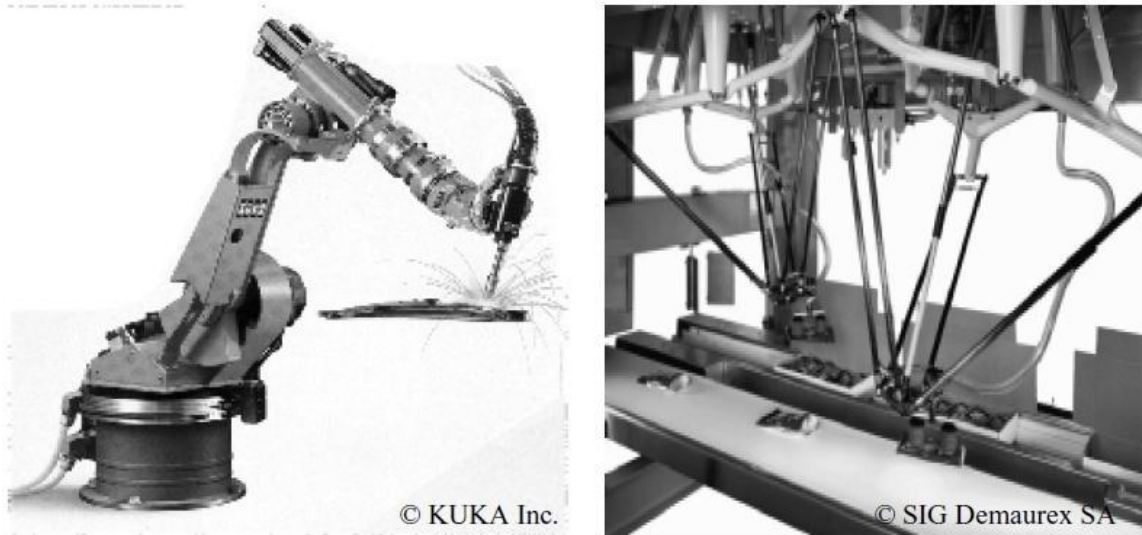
View of welding robot and parallel with robot of packaging chocolates
